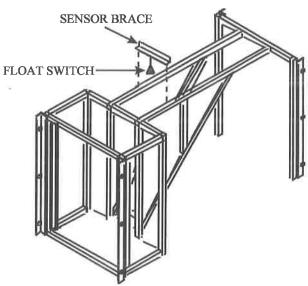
FLOAT SWITCH INSTALLATION
